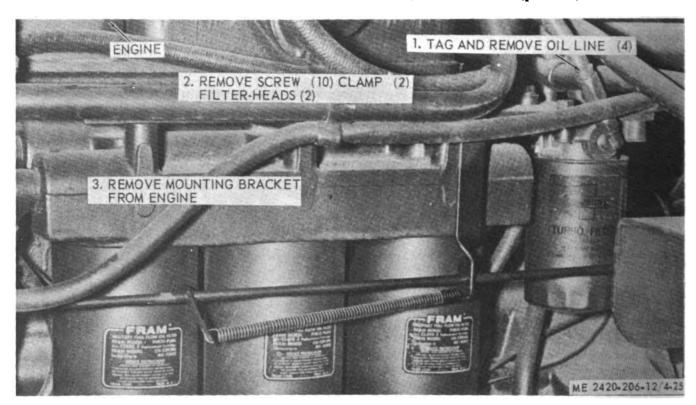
Engine and turbocharger filter head, removal and installation.
